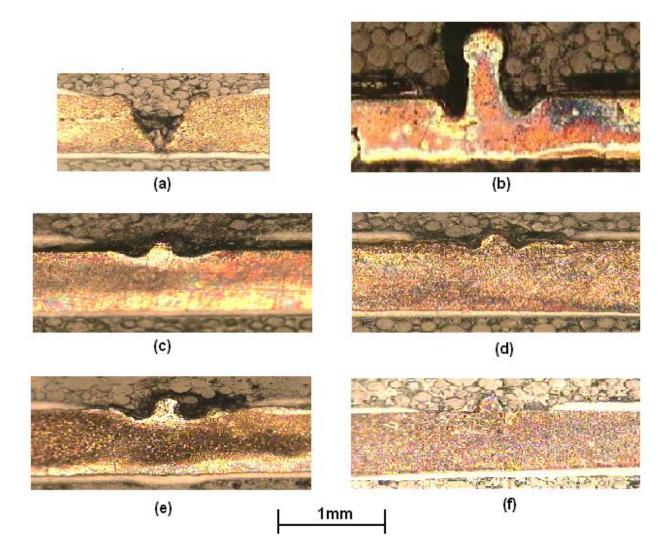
Optical image of the CO<sub>2</sub> laser welded samples in (a) at 20 m/min; (b) at 42 m/min;
